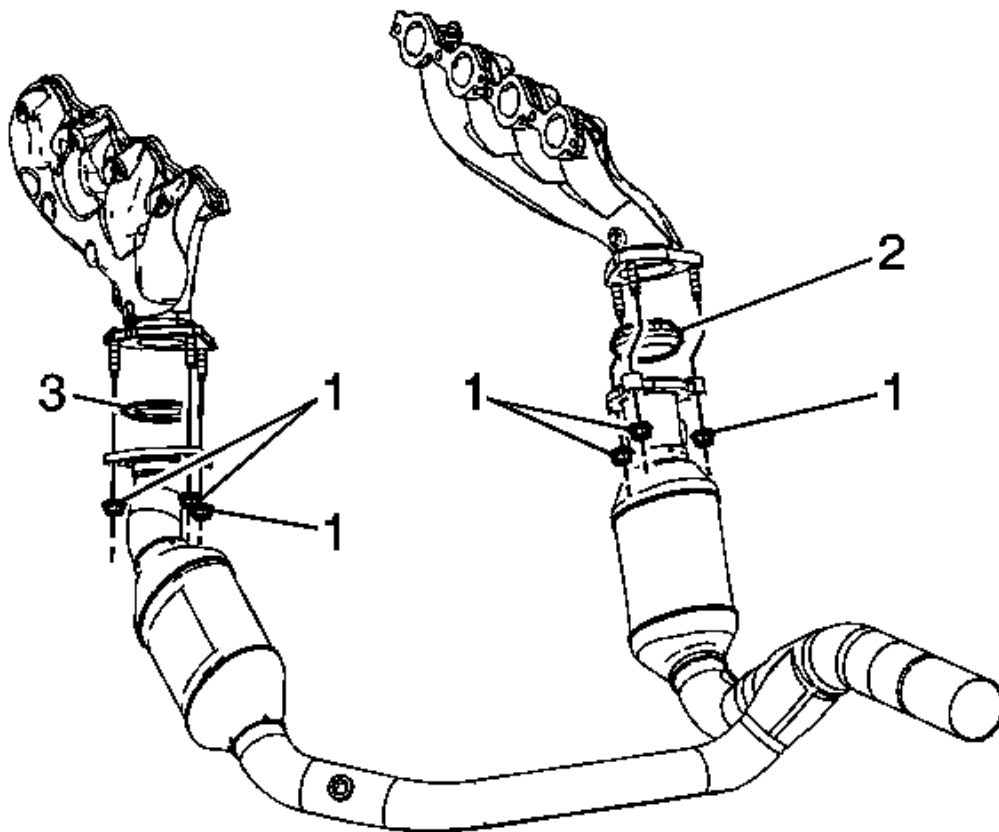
View Of Catalytic Converter To Exhaust Manifold Nuts & Exhaust Seals
